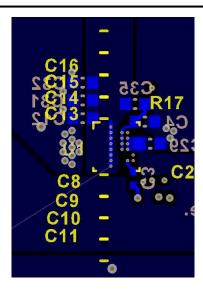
BQ25968 Layout Example - Bottom Layer
